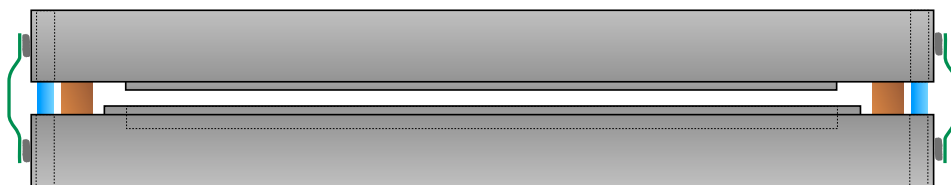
The figure shows a 2D illustration of the mould tool with a circumferential vacuum bag (green), guiding-pins (blue) and cork spacers (brown) as used in test T2.
